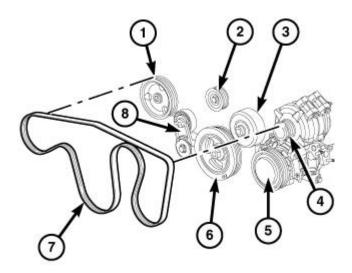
Belt Tensioner, Accessory Drive Belt & Belt Routing Courtesy of CHRYSLER GROUP, LLC
